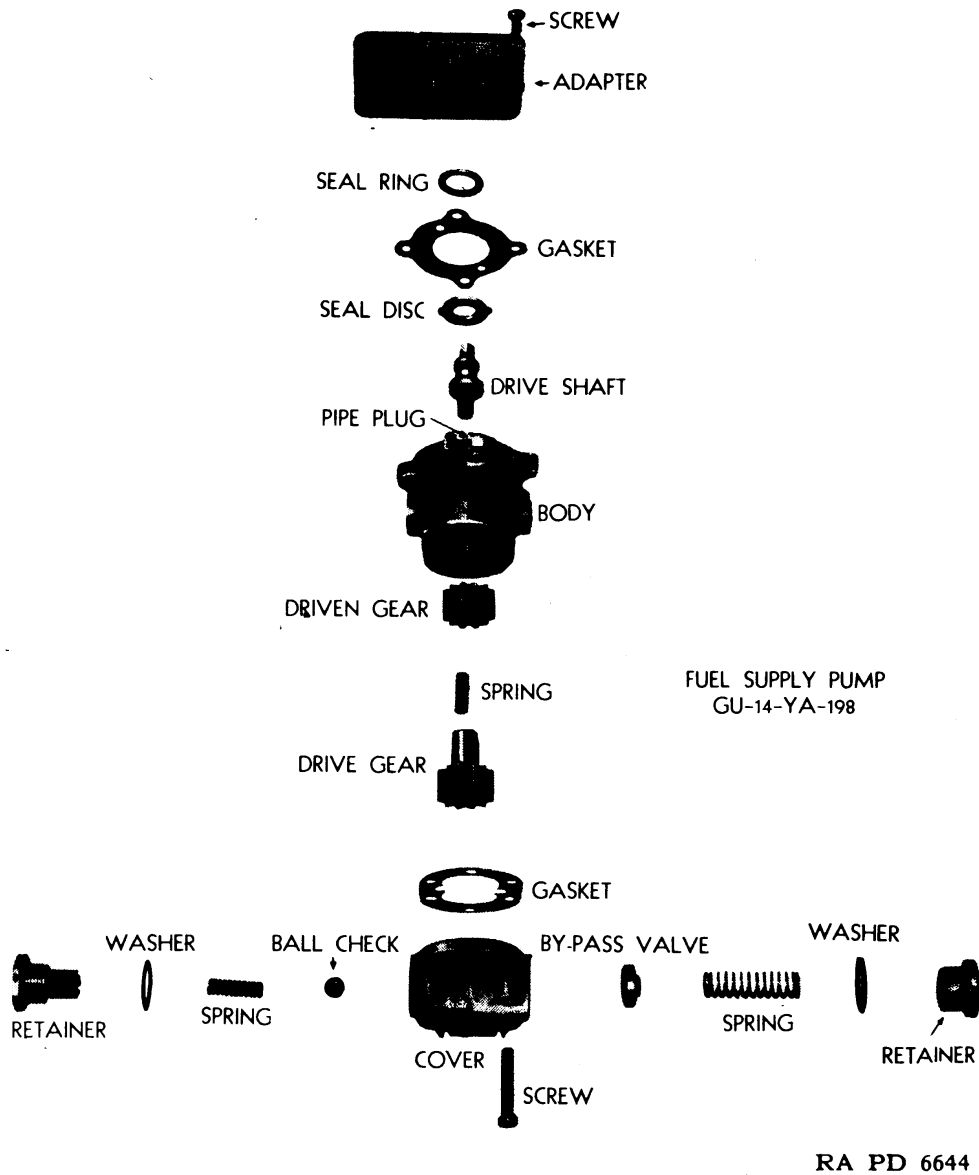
The Pesco 386-A fuel supply pump assembly.
